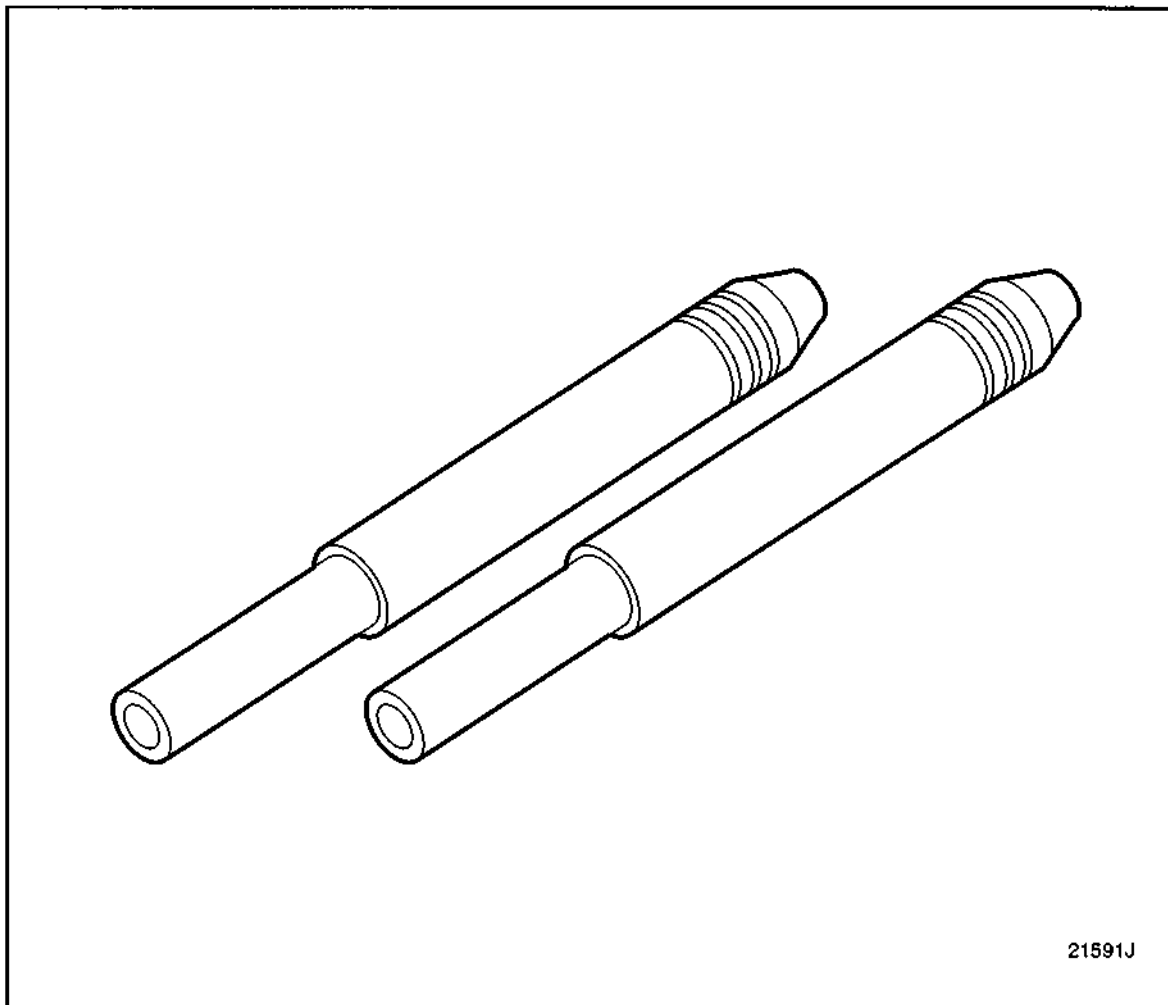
Cylinder Head Guide Studs,J 35784
